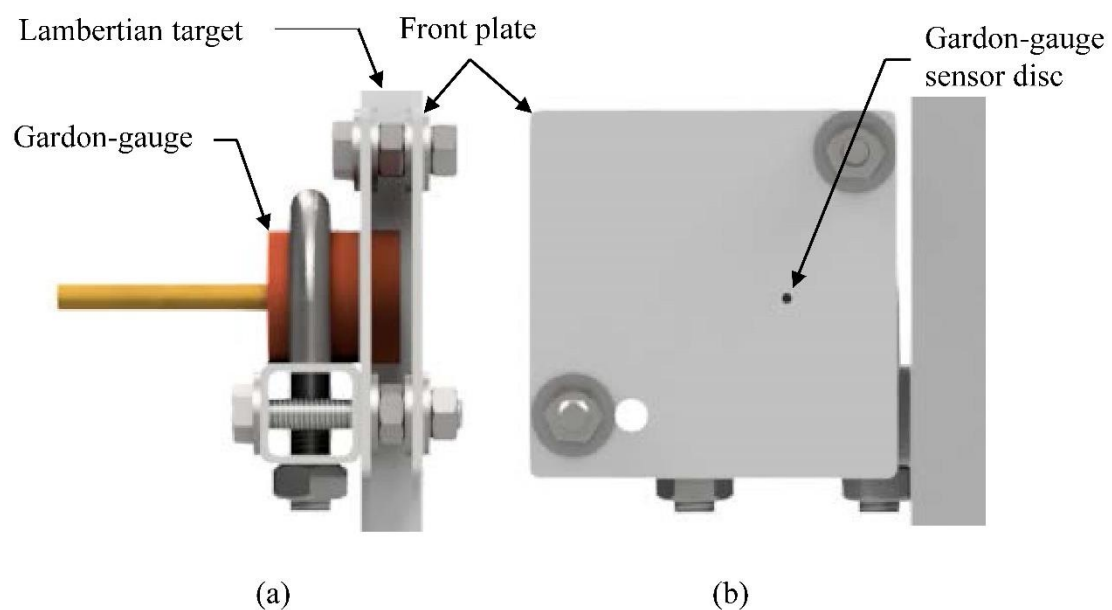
Side view of the Gardon gauge mounting fixture (a) and front view (b)
